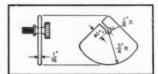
Details of cam used to hold pressure roller off the capstan until machine is started.
